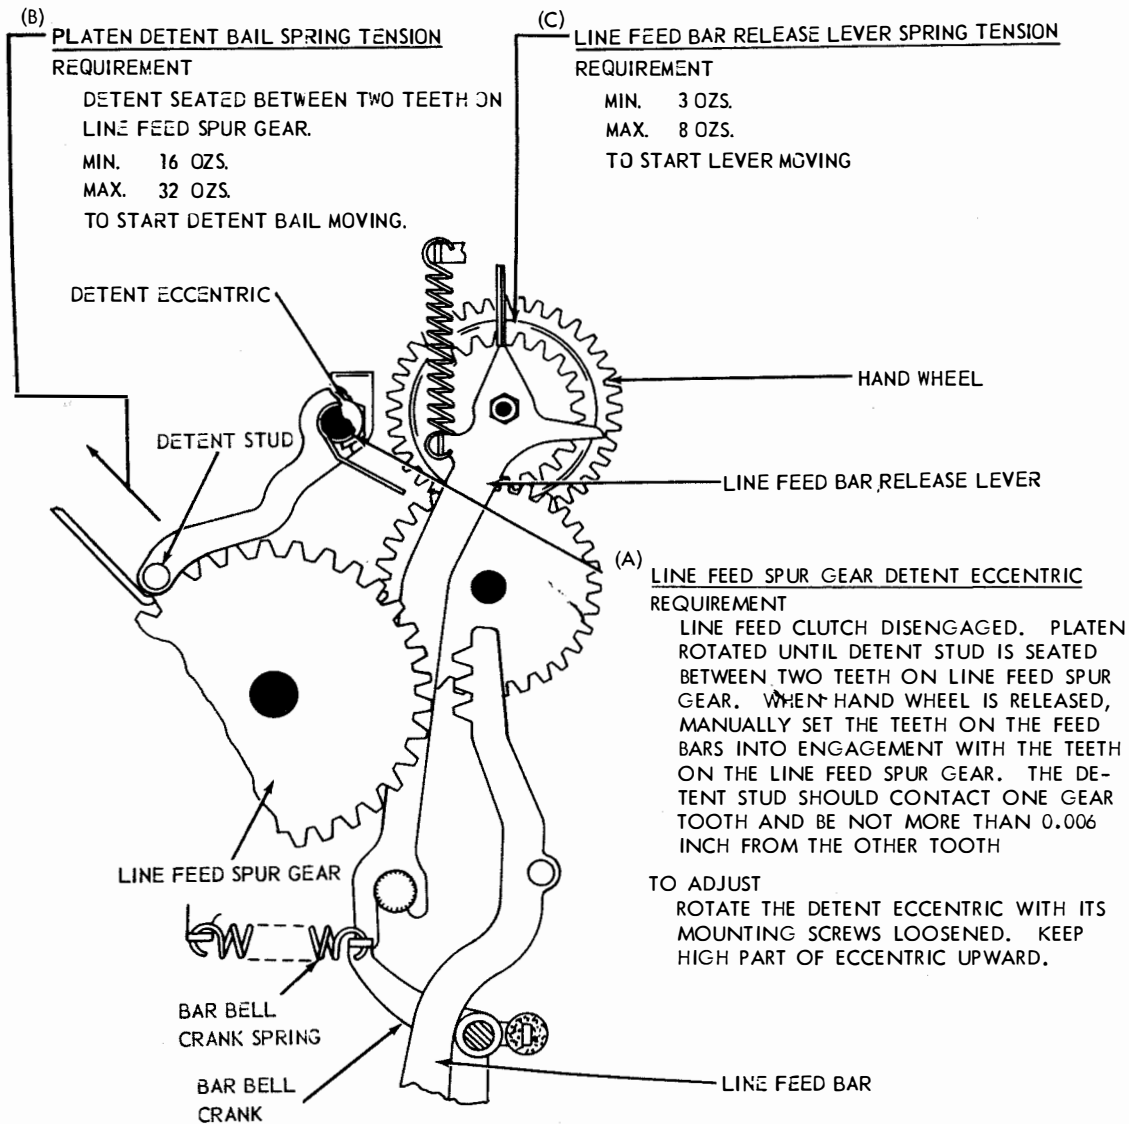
TYPING UNIT, LINE FEED MECHANISM, RIGHT SIDE VIEW
